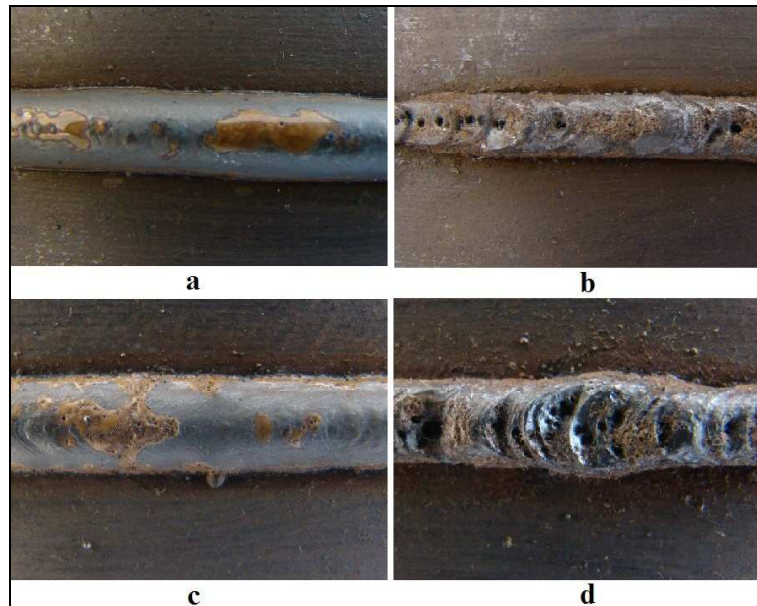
Sample 014 – drawing bead. a – place without defects (dip transfer), b – place with defect (dip transfer), c – place without defects (pulse transfer), d – place with defect (pulse transfer).
